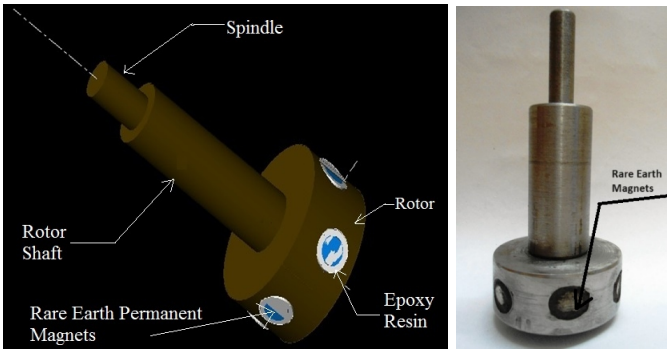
3-D design model and actual fabricated SAP magnetic tool.
